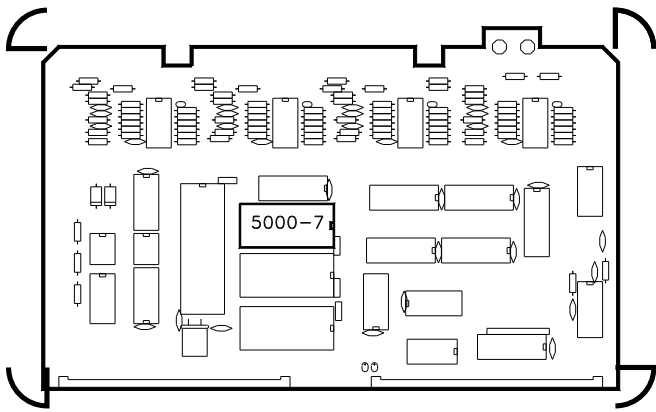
OmniLink 5000 Die Protection Module Circuit Board
